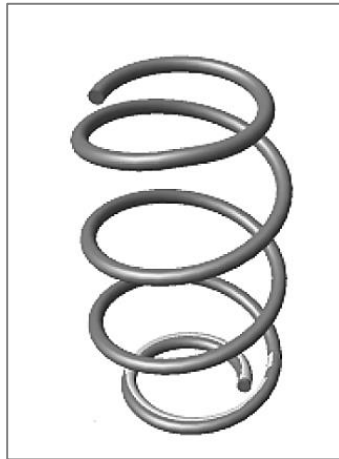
Coil Spring with Offsetting End Coils [34]
